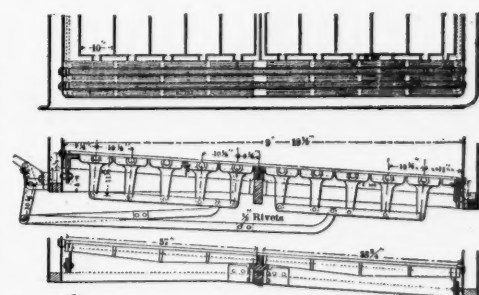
Transverse Shaking Grates, with Tubes and Filling Pieces at the Side, Firebox over Drivers—New York Ontario & Western, 1896.
